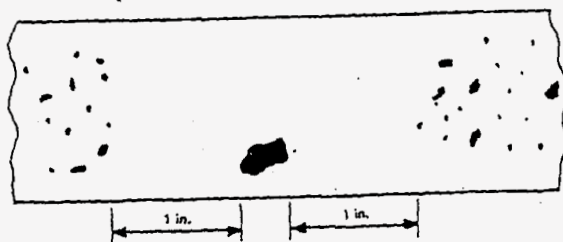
CHARTS FOR 1 OVER 3/4 IN. TO 2 IN., INCLUSIVE
